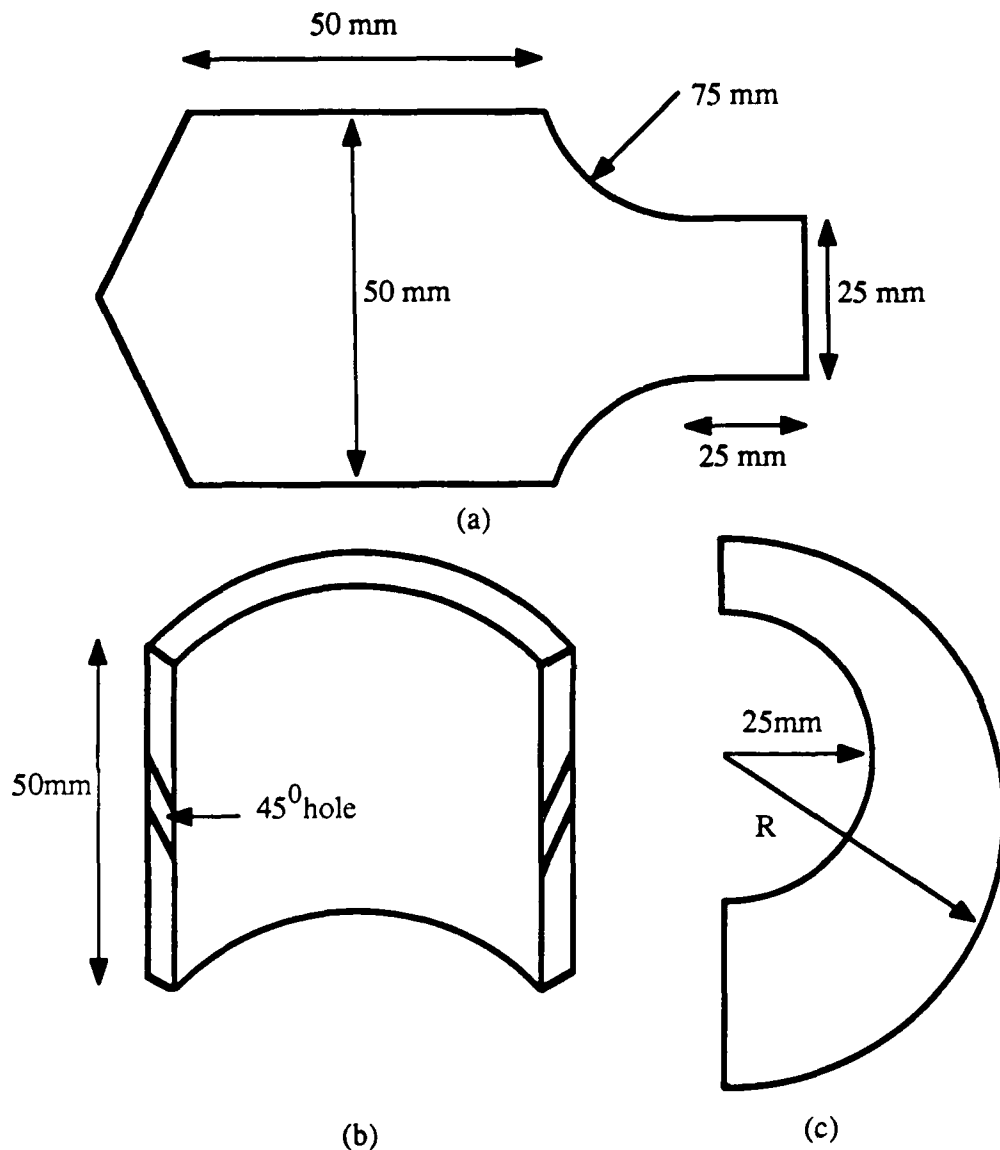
(a) The dimensions of the cone side of the substrate, (b) one half of the cylindrical mould employed to make the joint, and (c) the steel cam employed for measuring shear strain.
